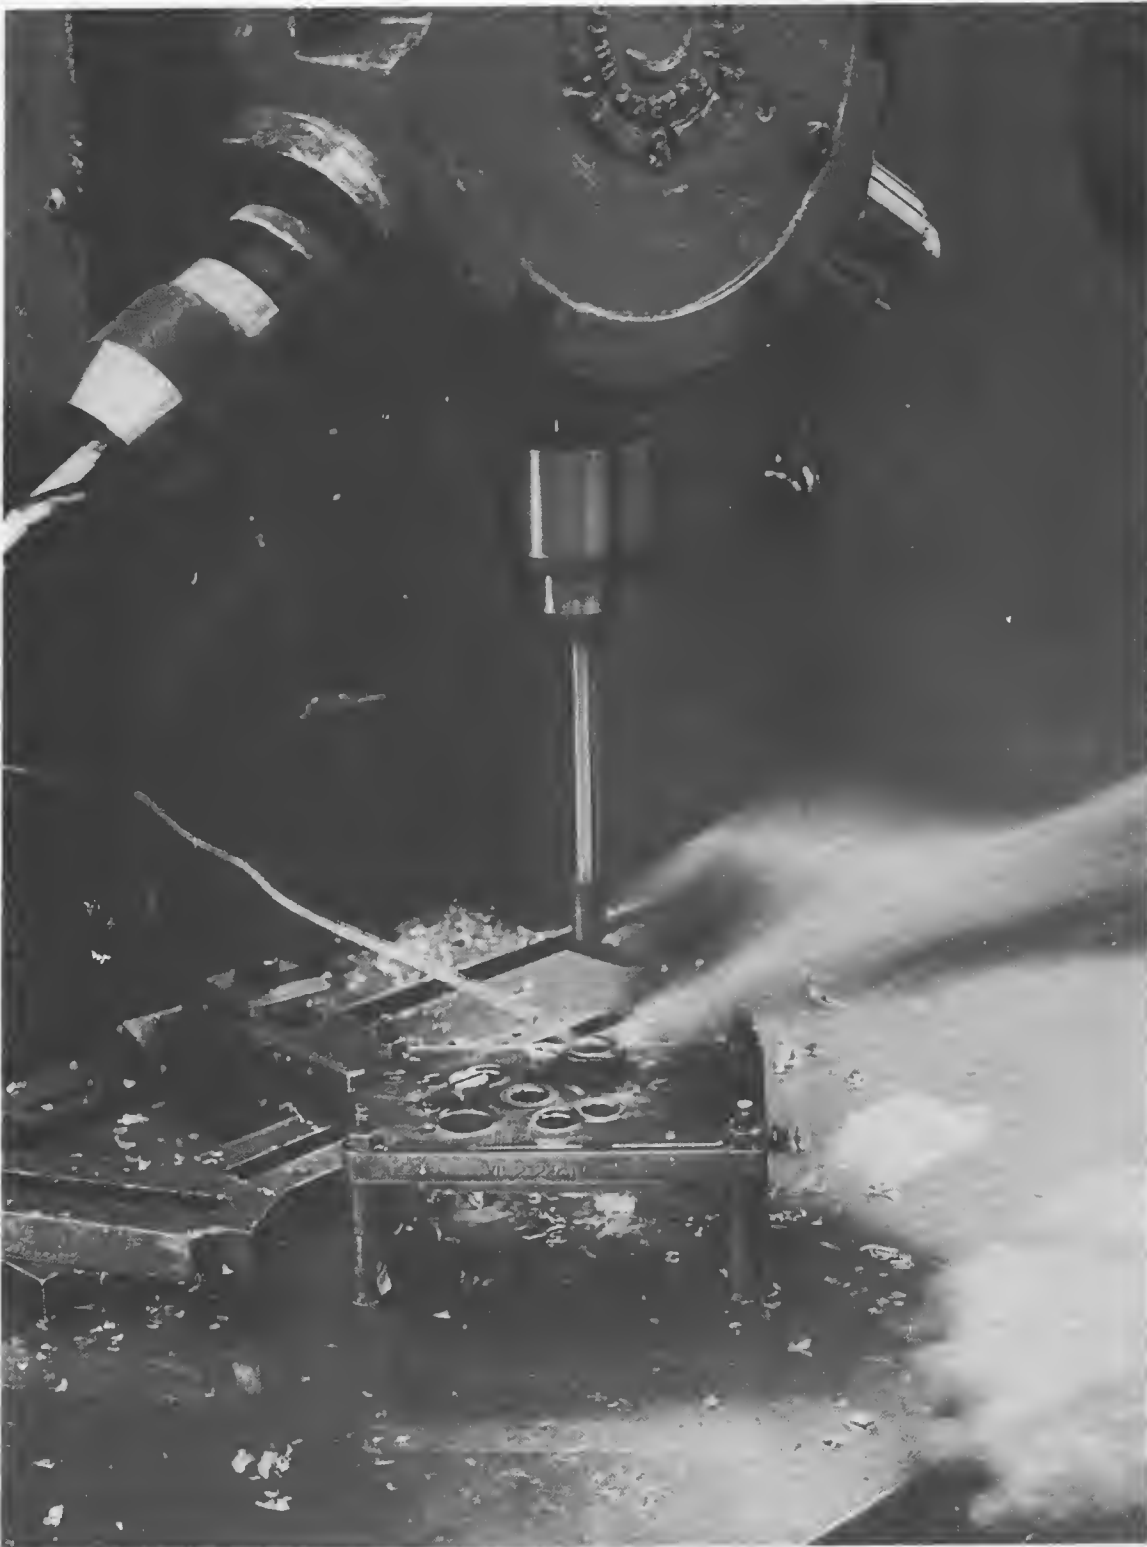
CHANGING BUSHINGS BEFORE REAMING
